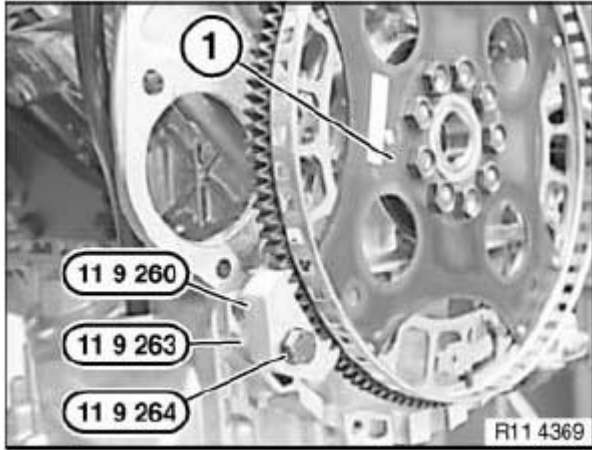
Identifying Special Tools (11 9 260), (11 9 263), (11 9 264) And Flywheel
